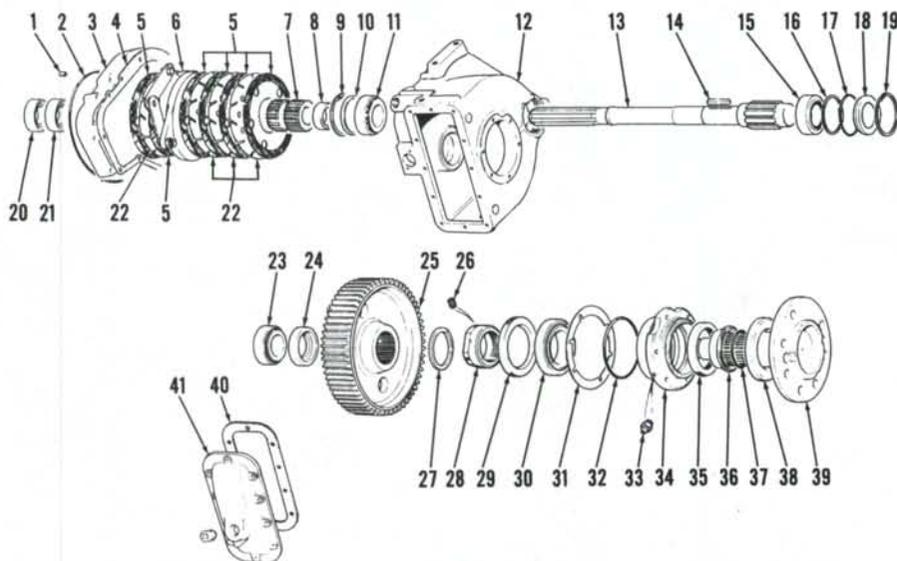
Exploded view of Model 1594 and 1690 final drive showing component parts and their relative positions.
